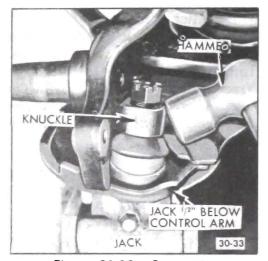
Separating Steering Knuckle from Ball Joint
